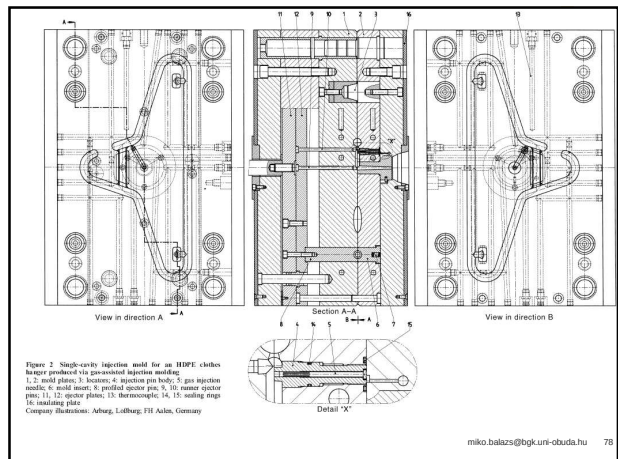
Single-cavity injection mold for an HDPE clothes hanger produced via gas-assisted injection molding.
